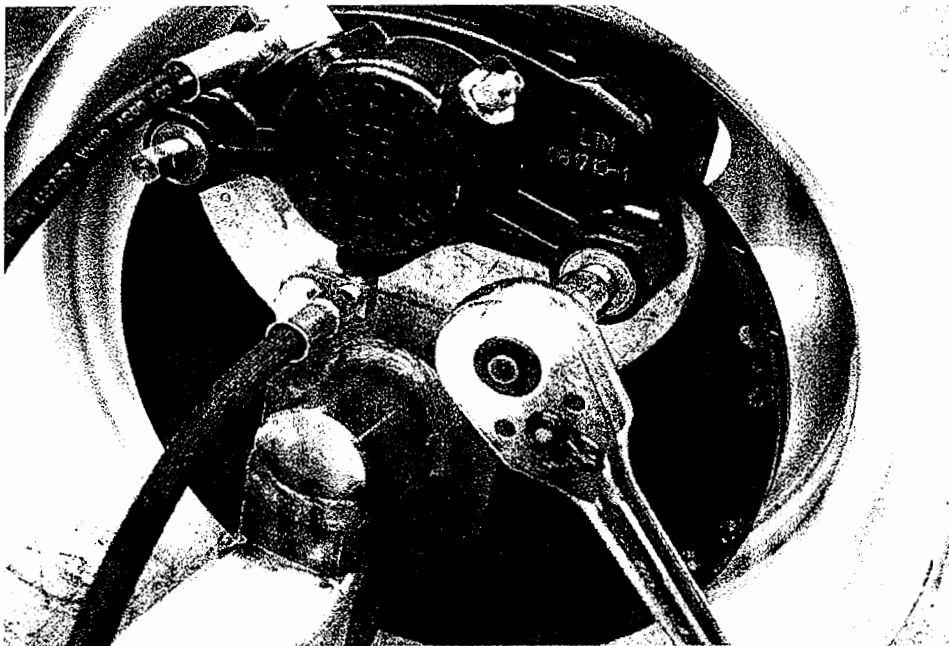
Using the Socket/Ratchet Drive Loosen the First Slider Pin. You May Start With Either the Left or Right Slider Pin But Only Remove One Slider Pin.
